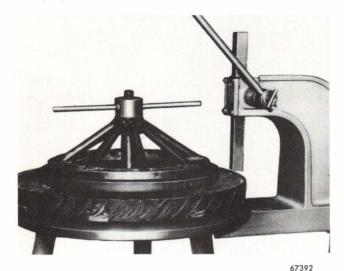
Aligning the Turbine Nozzle Outer Ring with a Locally-fabricated Fixture in an Arbor Press
